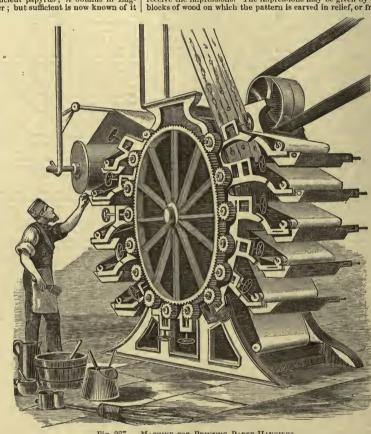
MACHINE FOR PRINTING PAPER-HANGINGS.
